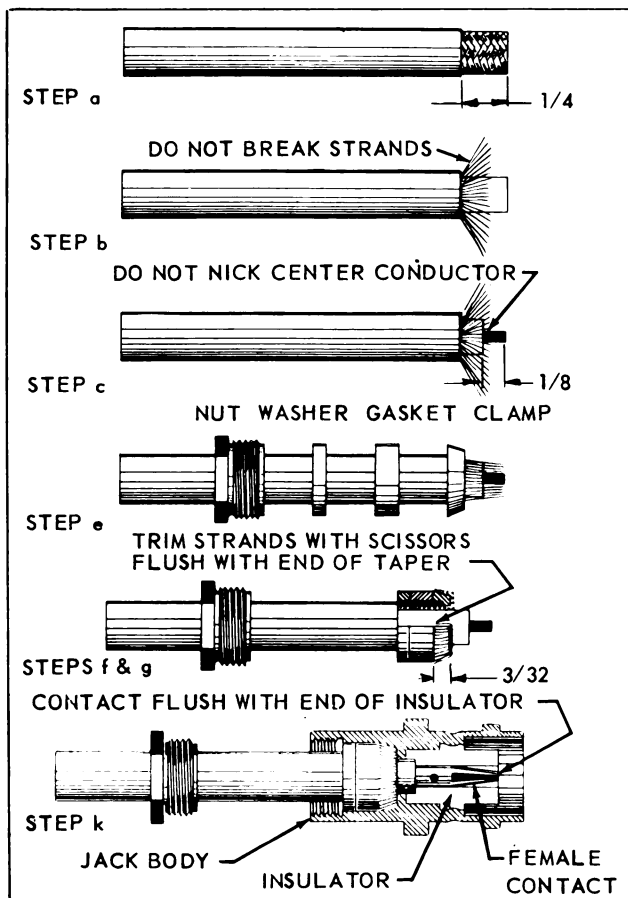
Attaching Standard BNC Connectors to Coaxial Cable
